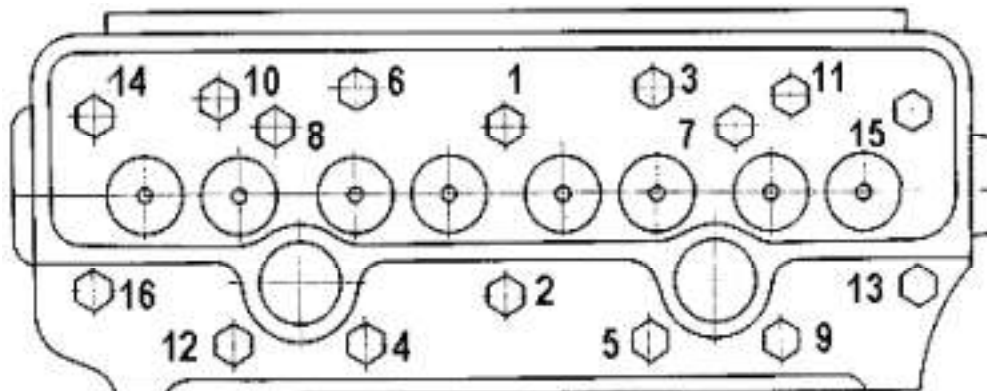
Order of tightening of bolts fastening cylinder head
